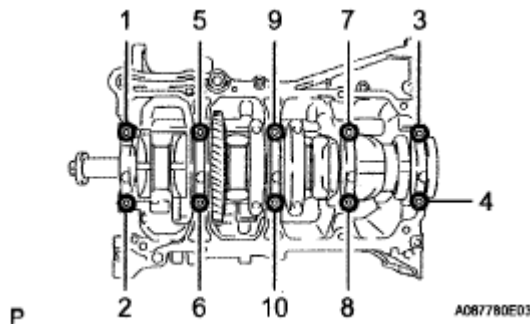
Identifying Bearing Cap Bolts In Sequence
